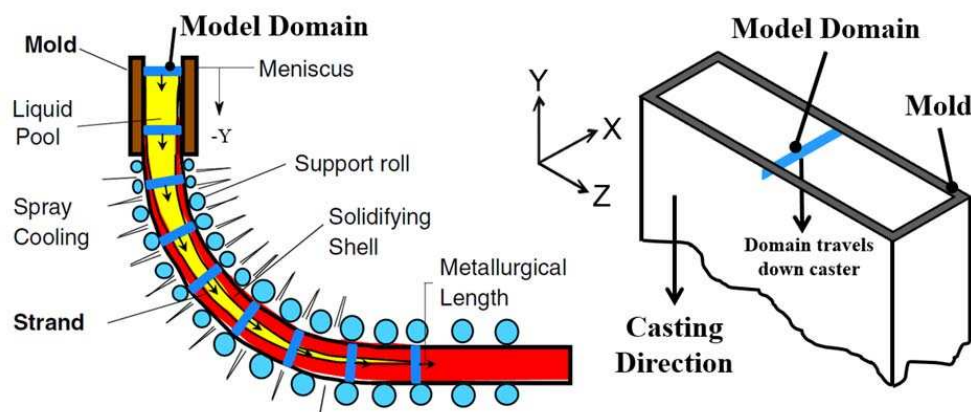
Location of the model domain in continuous slab-casting machine a) side view (ccc.illinois.edu); b) isometric view.
